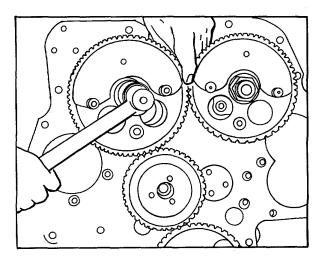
Removing or Installing Nut on Camshaft or Balance Shaft
